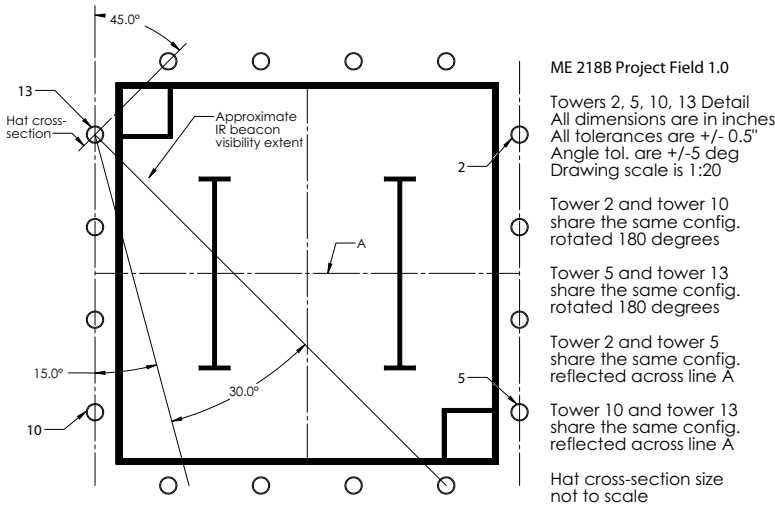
Goal Tower Detail for towers 2, 5, 10 & 13
